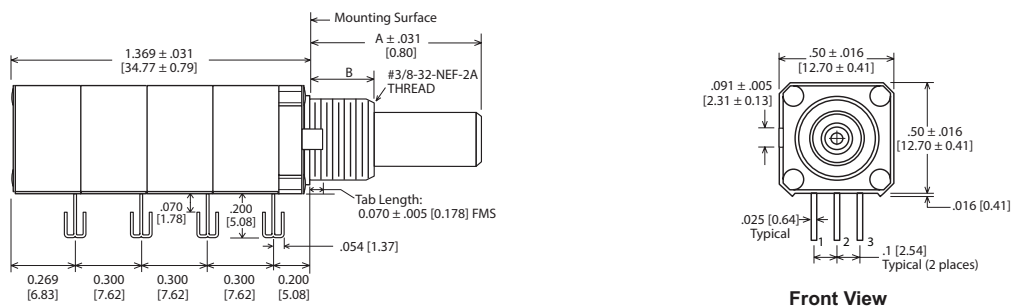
SHA: Dual Potentiometer or RS, Solder Hooks, 3/8" Dia. Bushing
